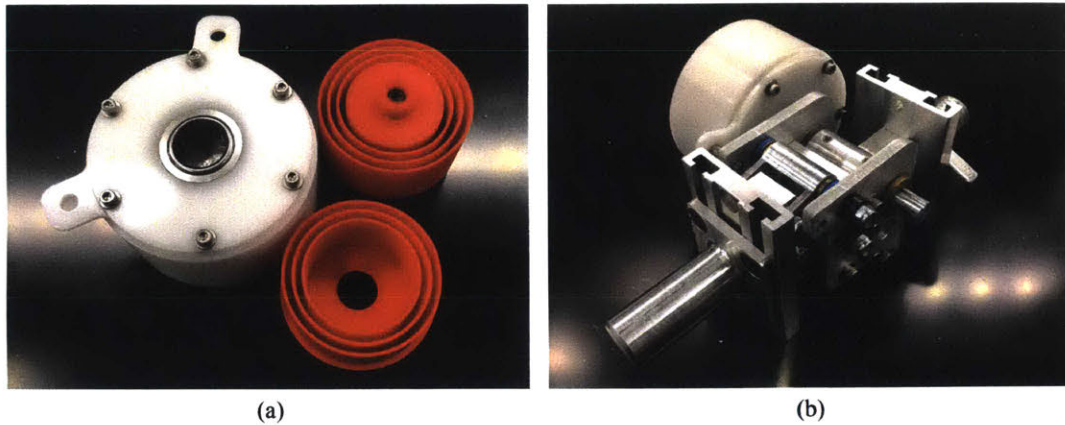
(a) Photograph of a fin architecture damper and the 3D printed rotor and stator parts that concentrically mesh between each other. (b) Photograph of the damper in the knee prototype assembly.
